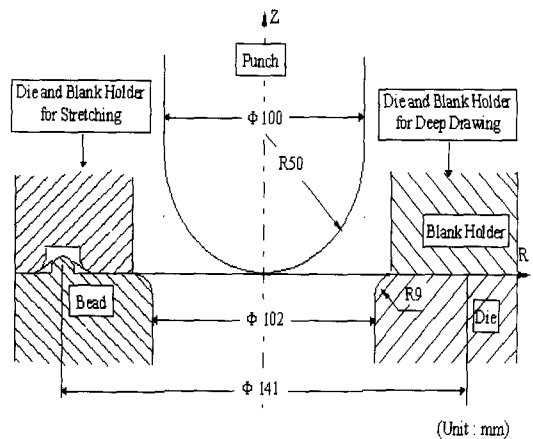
Geometric description of the tooling for stretching and deep drawing
